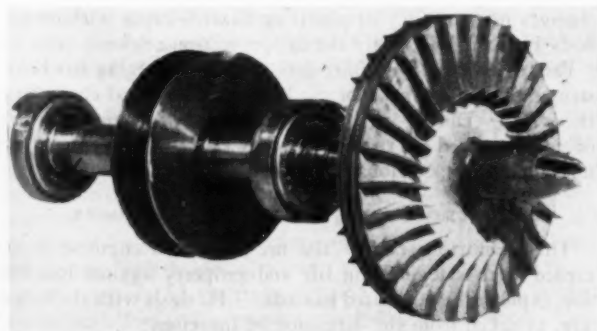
SMALLEST SUPERCHARGER ROTOR (60-100-HP ENGINES)
